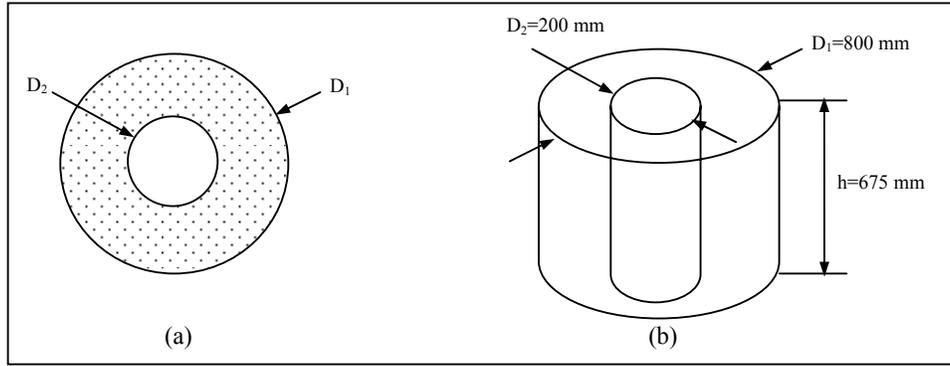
Dimensions of the processing chamber: (a) inside and outside abrasive cages, (b) Rotatable and curved abrasive bottom.
